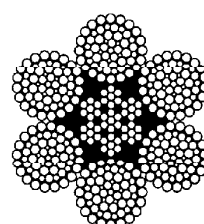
6 x 61 Filler Wire Warrington Seale IWRC
